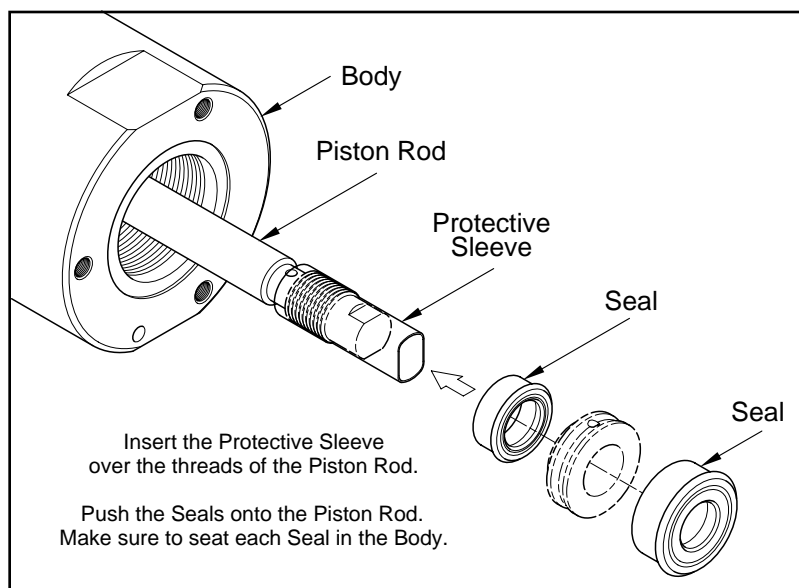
Use of Kit Sleeve to Install Seals onto the Piston Rod
